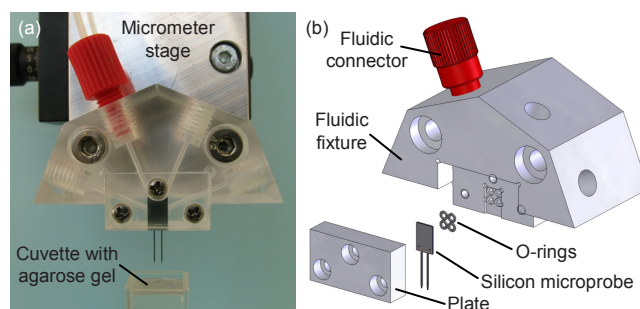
Fluidic connection to the microprobes: (a) Microprobe mounted into the fluidic fixture together with a cuvette filled with agarose gel, (b) exploded view showing the probe fluidic connection by o-rings
